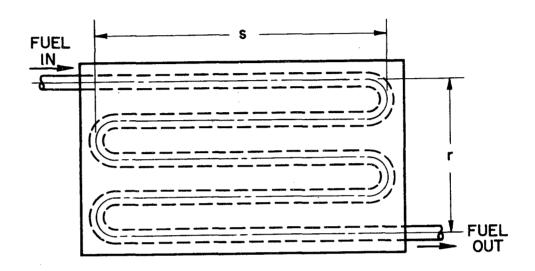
Schematic of a Fuel-Cooled Plate with a Serpentine Fuel Passage
